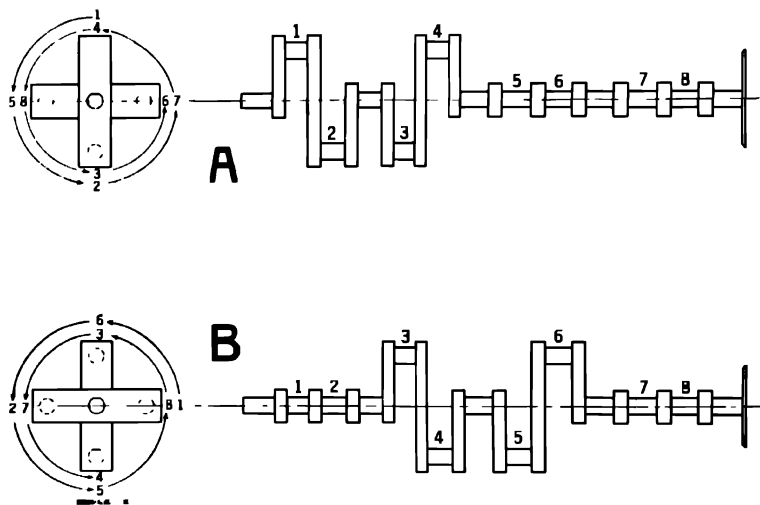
Possible Crankshaft Arrangements for a Straight Eight.
